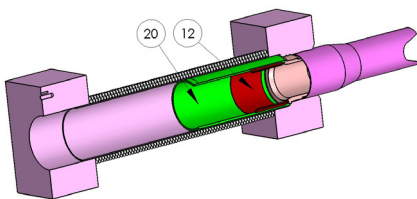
Schematic representation of the lattice tube shielding sleeve assembling
